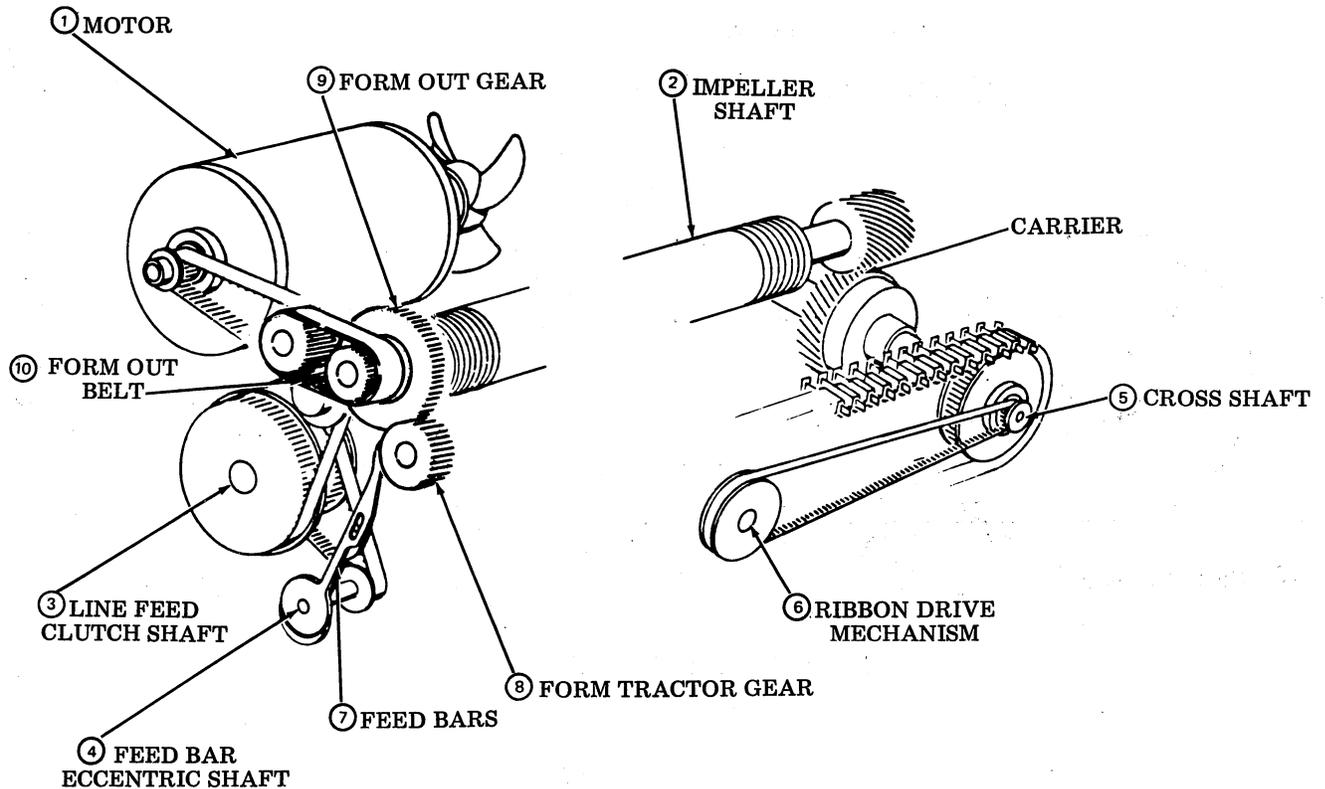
Mechanical Drive Tractor Feed and Forms Access
